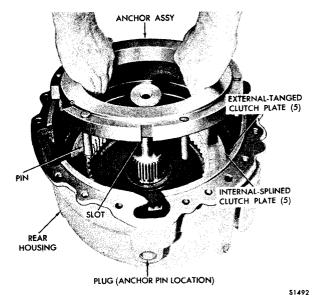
Installing low-range clutch anchor assembly (-3 underdrive model)
